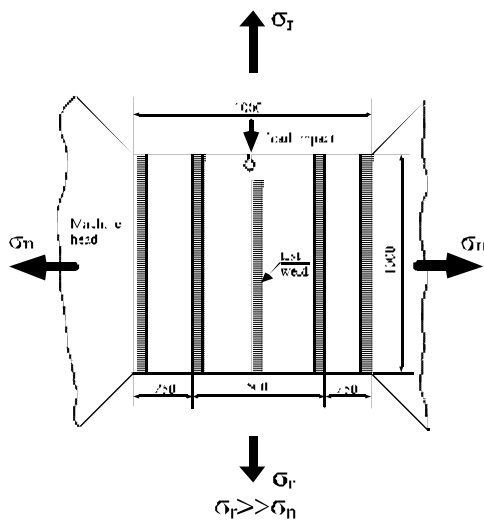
Dimensions of the specimen and its assembly in the tensile machine for isothermal Robertson test
